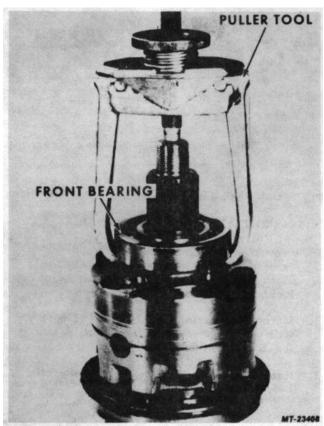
Removing Front Bearing From Inter-Axle Differential
